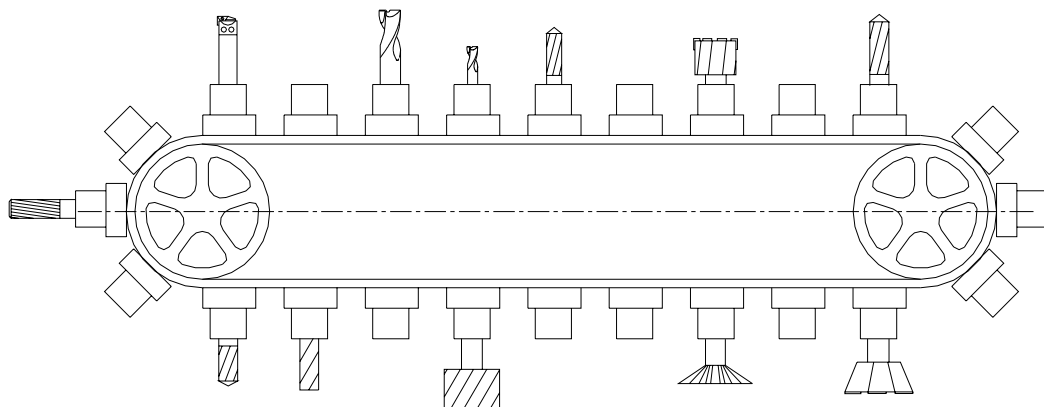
A chain type tool magazine for holding larger number of spindle tooling used in CNC machining centres.
